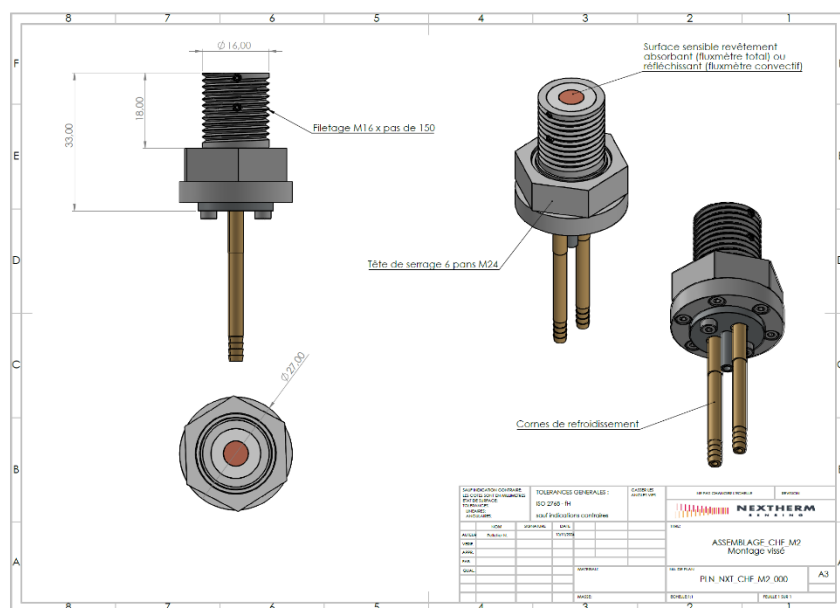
CHF heat flux sensor with M16 threaded mounting interface (reference M2)
